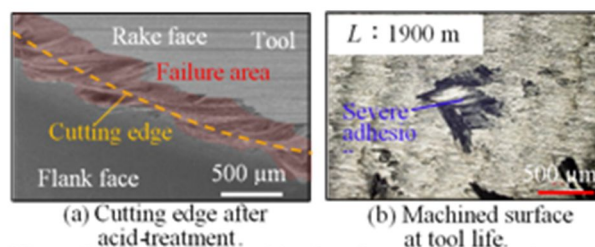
Photograph of machined surface and cutting edge at tool life.
